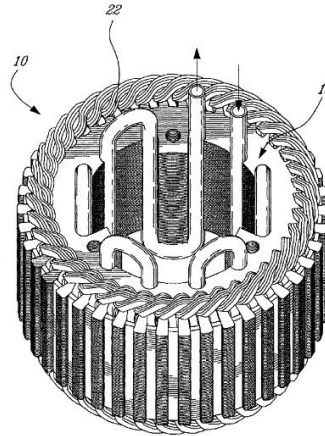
TM4 Patent US6819016B2 liquid cooling arrangement for electric machines concept [71]
